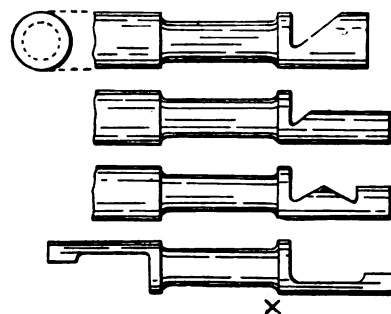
FORGING A ROCKER FROM THE SOLID.
